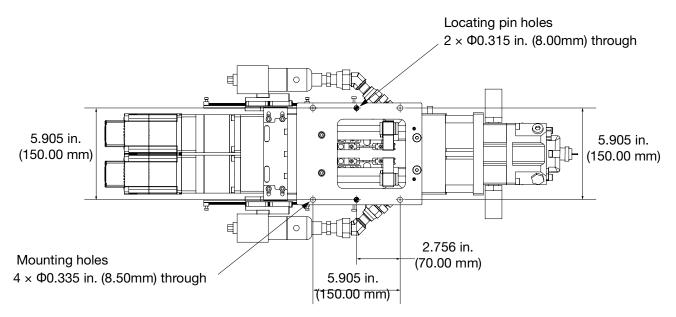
Mounting Hole Dimensions for Installing the PR-Xv Metering Unit - Supply Pump Feed
